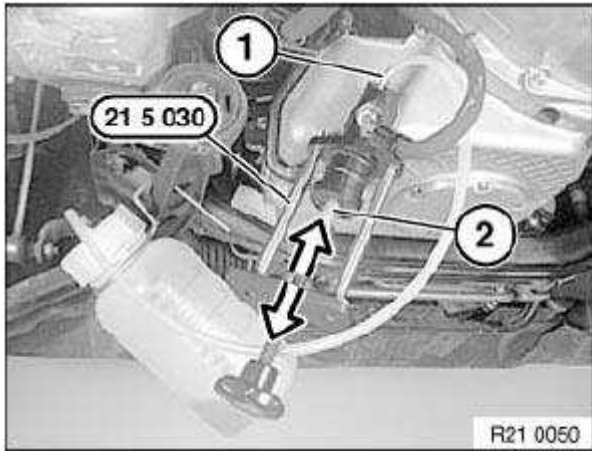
Retracting Piston Rod Of Clutch Slave Cylinder
